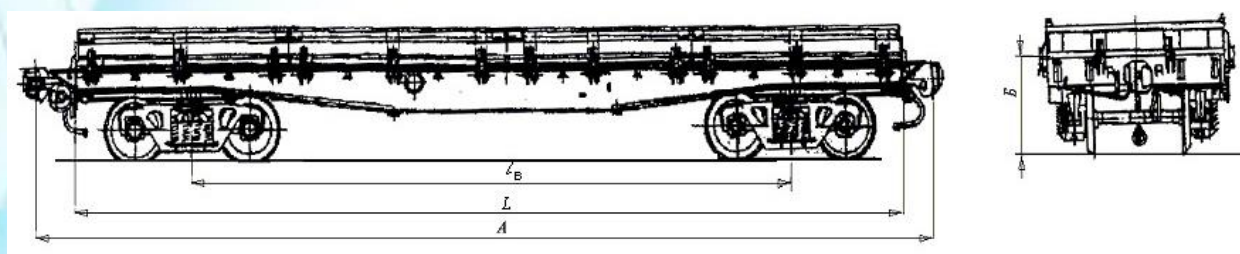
Technical parts of models of rolling stock on a 4-axle platform
